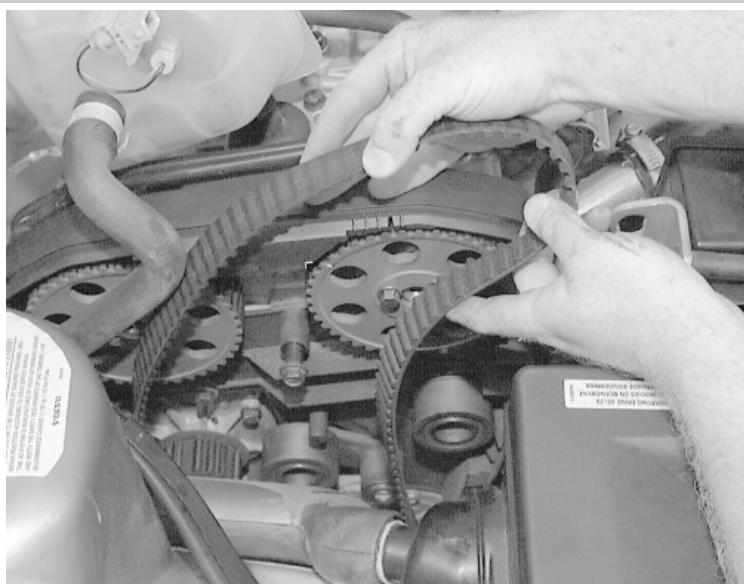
Slide the timing belt off the camshaft pulleys and remove it from the engine
